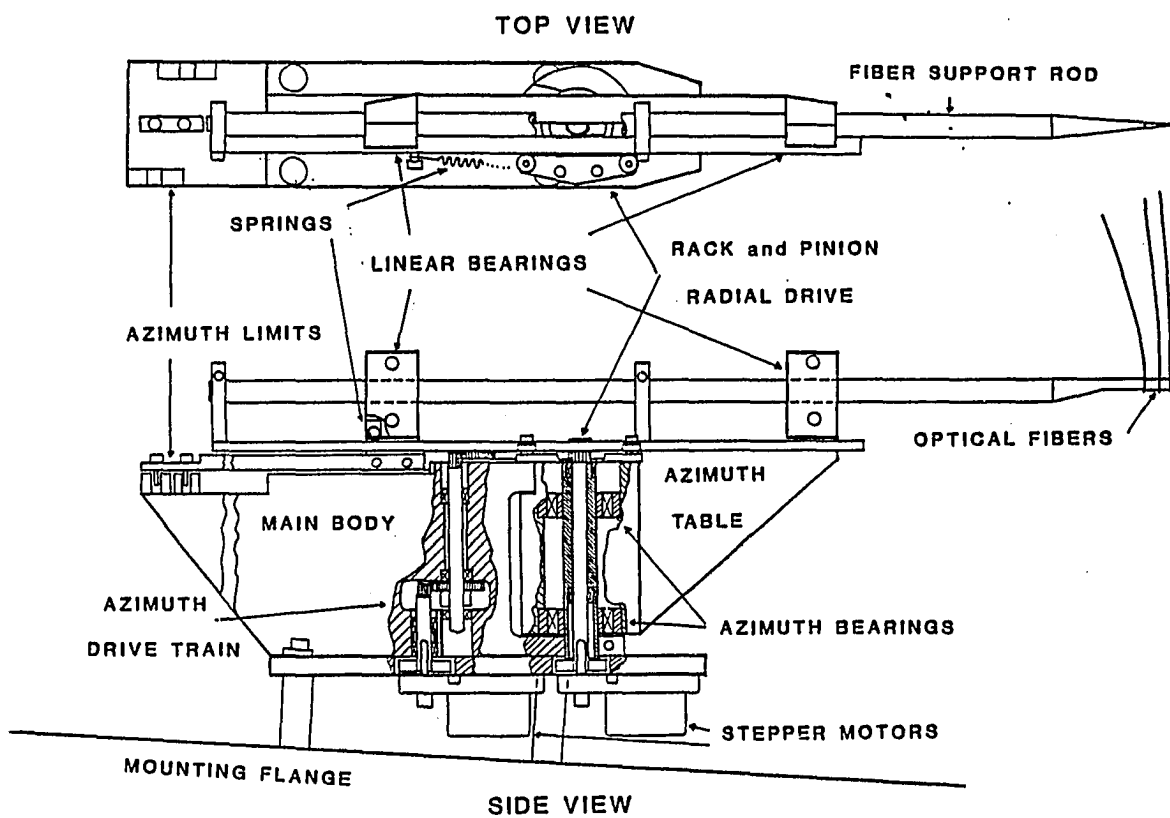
Engineering Drawing of Mark III Fiber Positioner
